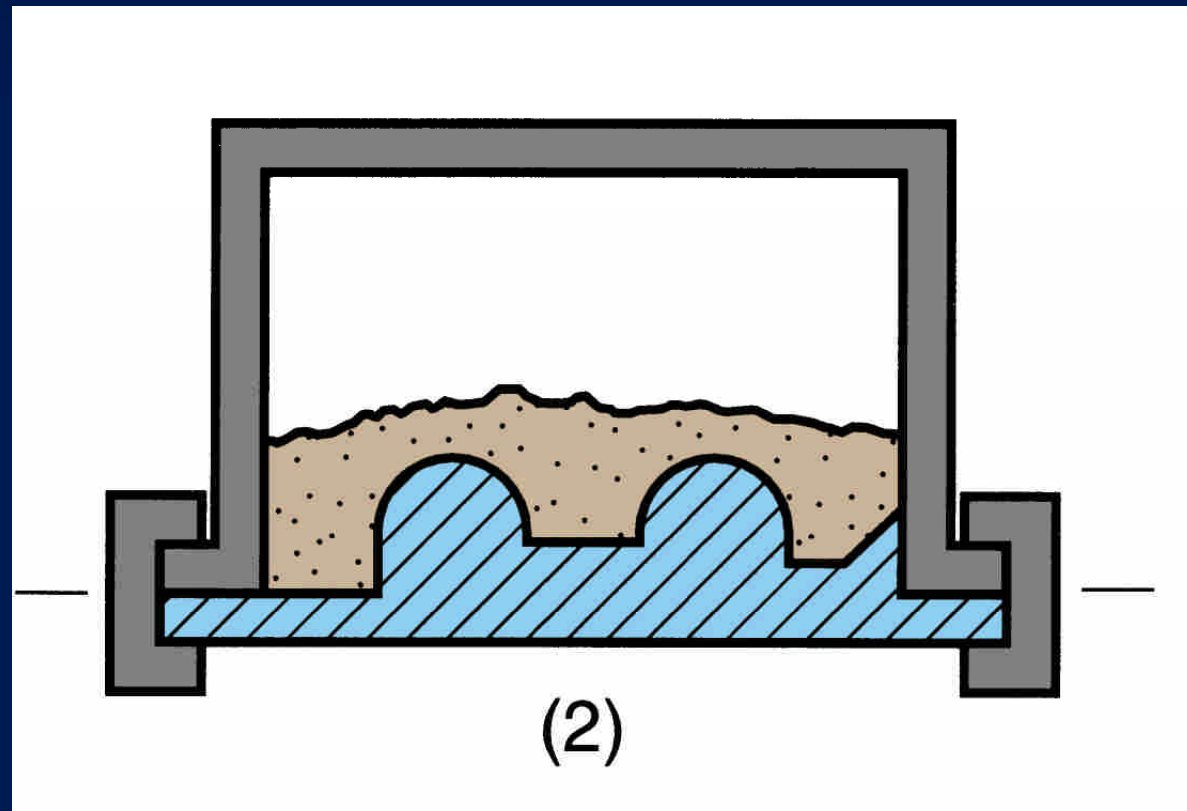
Steps in shell-molding: (2) box is inverted so that sand and resin fall onto the hot pattern, causing a layer of the mixture to partially cure on the surface to form a hard shell
